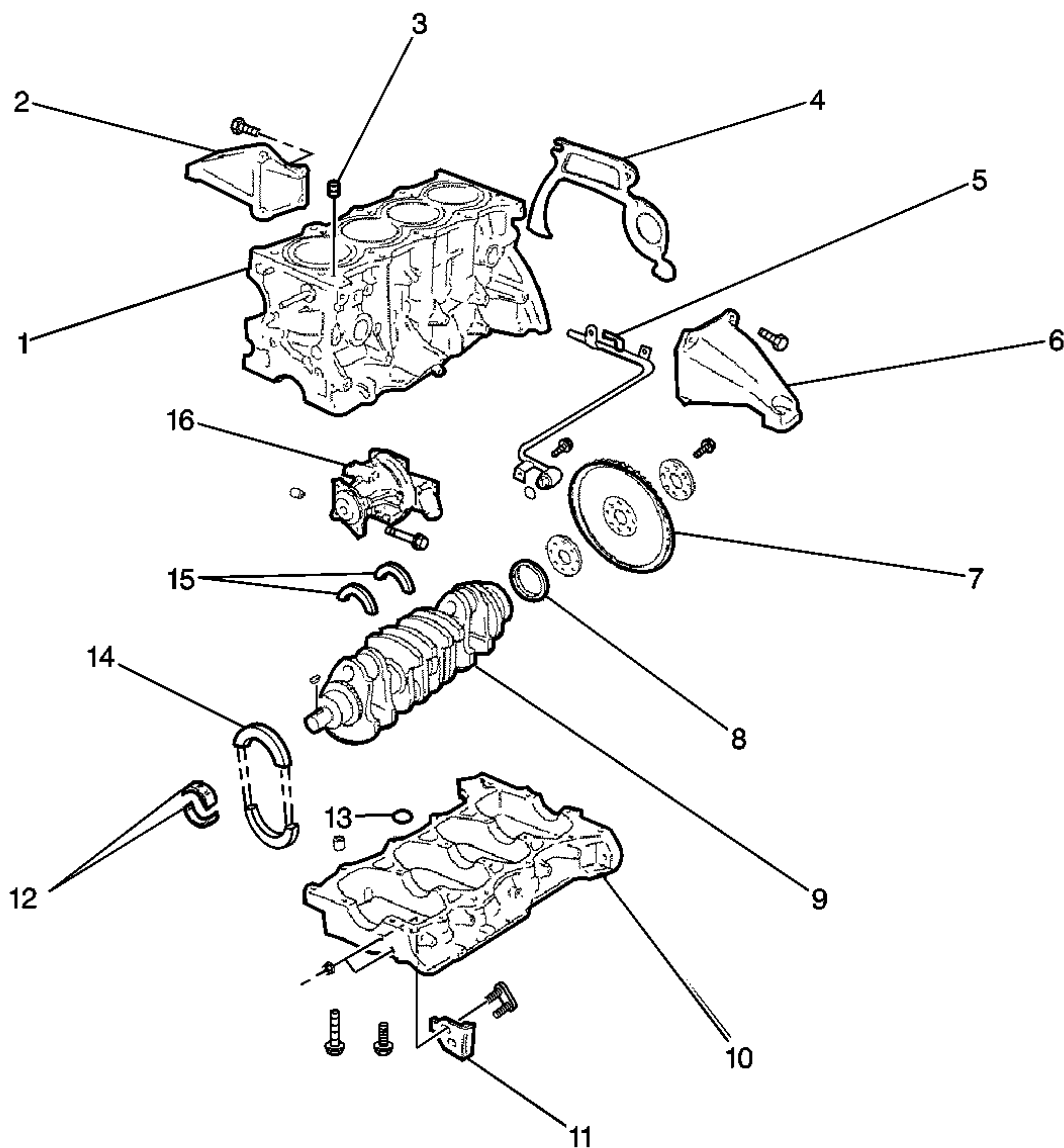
Main Bearings, Crankshaft, and Cylinder Block
